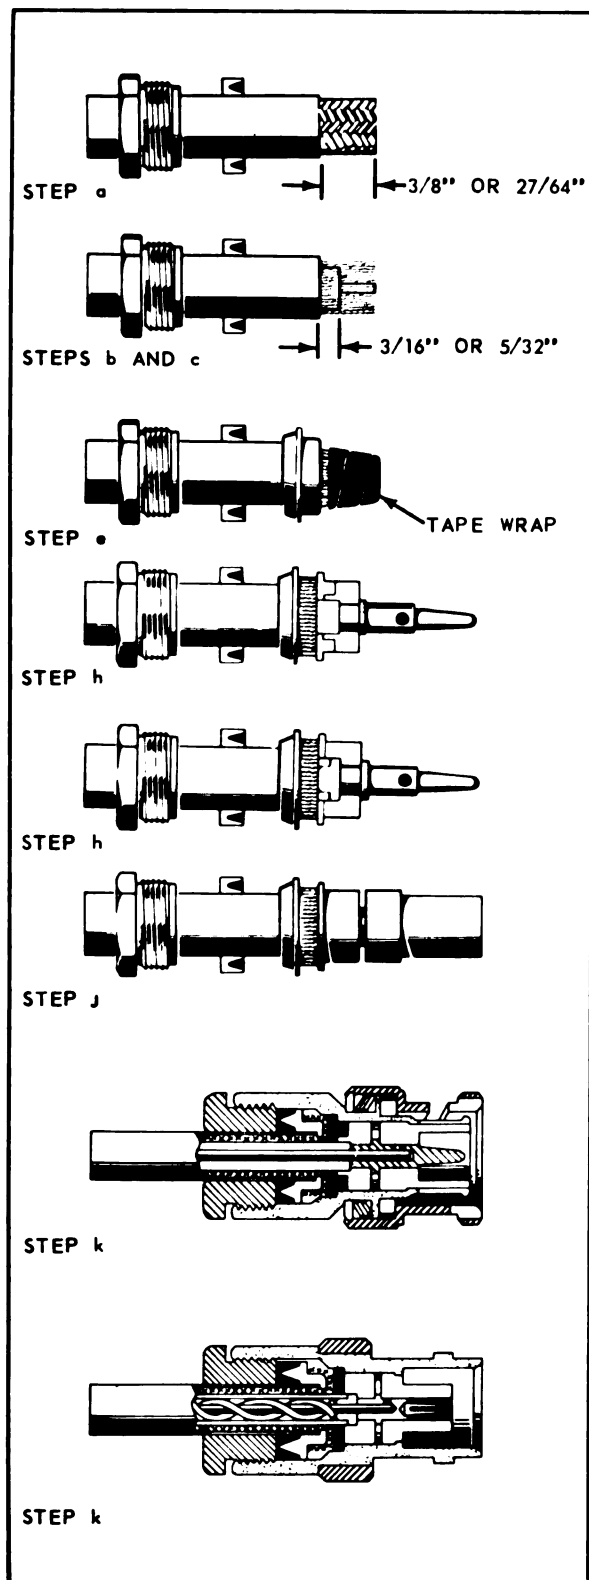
Attaching BNC Connectors With Captivated Contacts to Coaxial Cable
